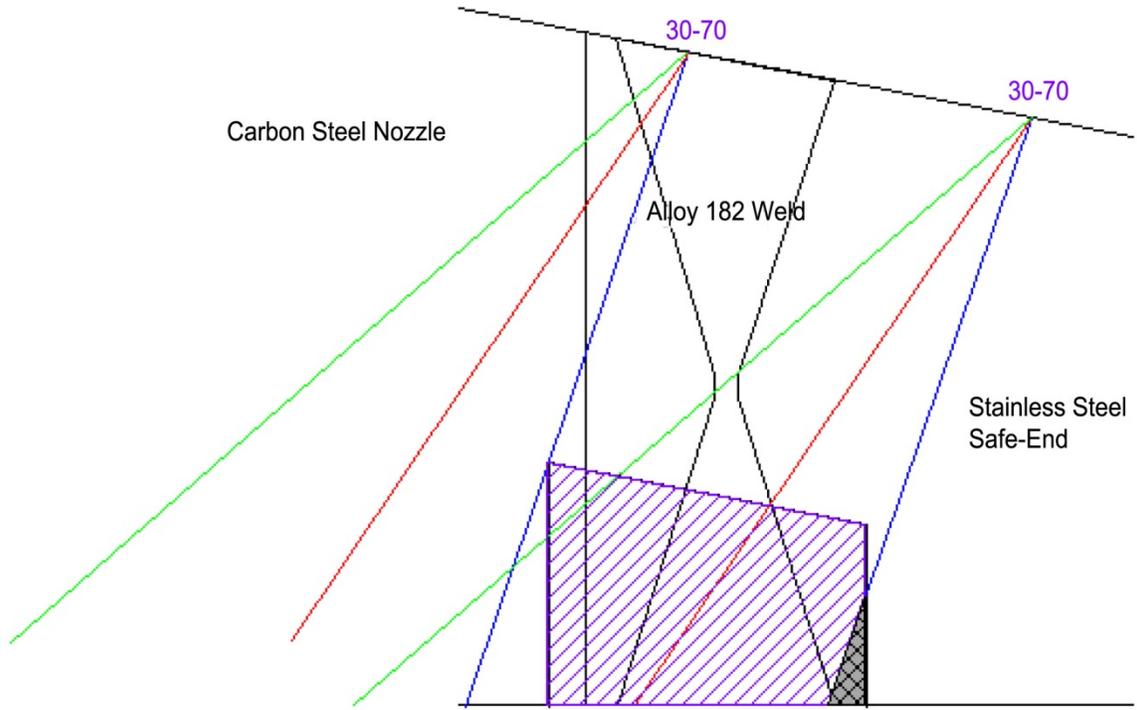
Steam Generator Cold Leg Nozzle Weld Axial Scan CRV Coverage Assessment
